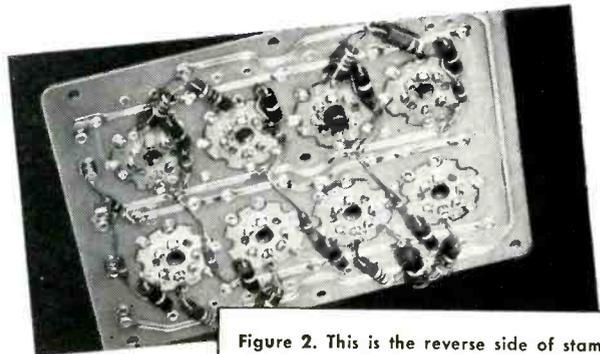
This is the reverse side of stamped circuit shown in figure 1. Both sides of the circuit were stamped in one operation.
